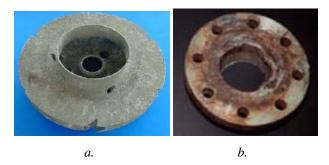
a. Pitting corrosion; b. Crevice corrosion.
